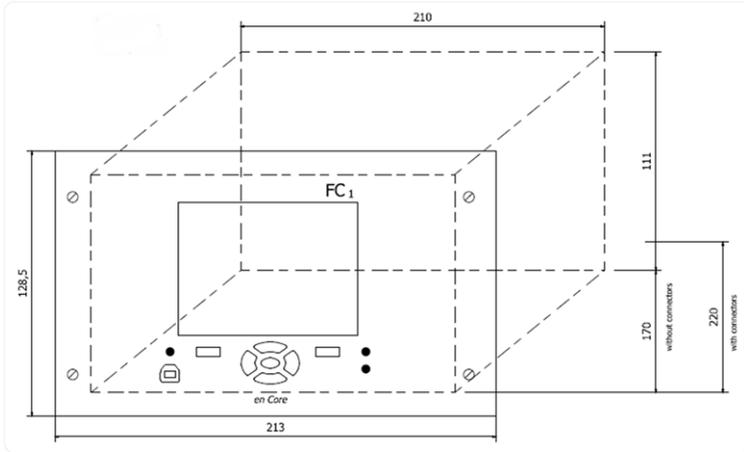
Dimensions for plug-in module 19", 3 U, 42 HP
